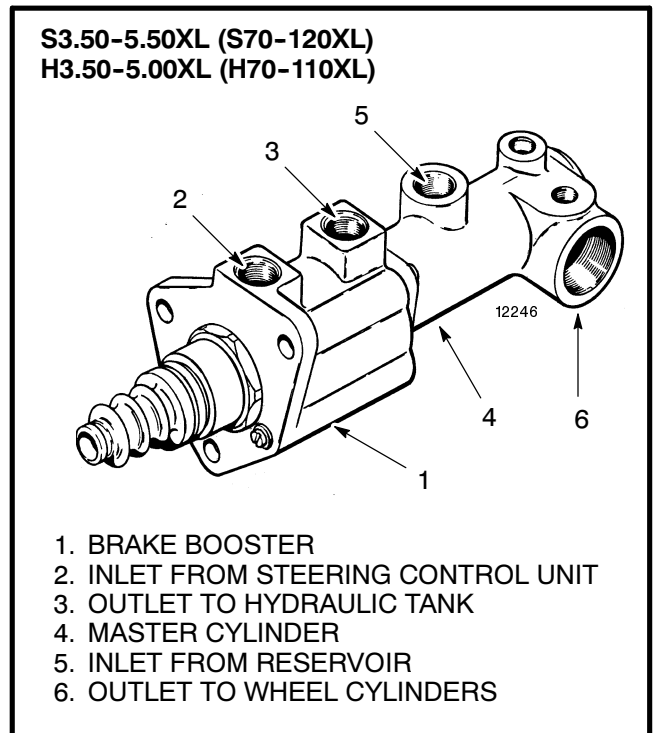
BRAKE BOOSTER AND MASTER CYLINDER
